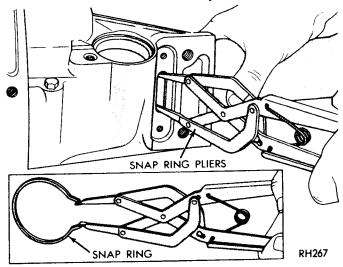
Remove or Install Extension Housing AUTOMATIC TRANSMISSION SERVICE GROUP
